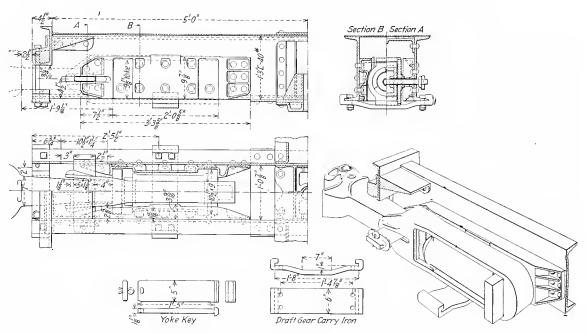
Miner Friction Draft Gear with Cast Steel Yoke and Key Coupler Connection for Freight Cars. W. H. Miner.
